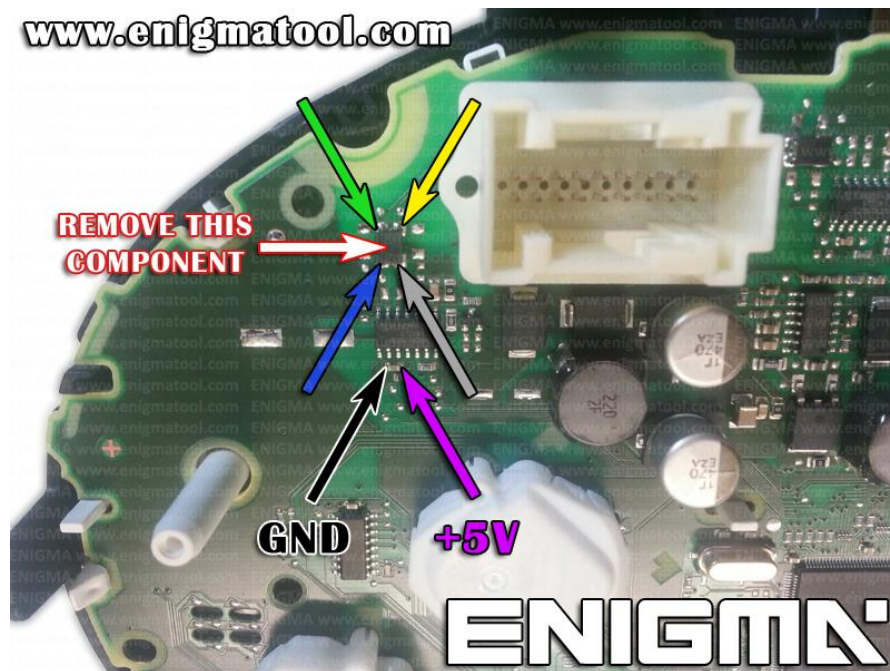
Solder cables according to the colors like shown on the photo above.
